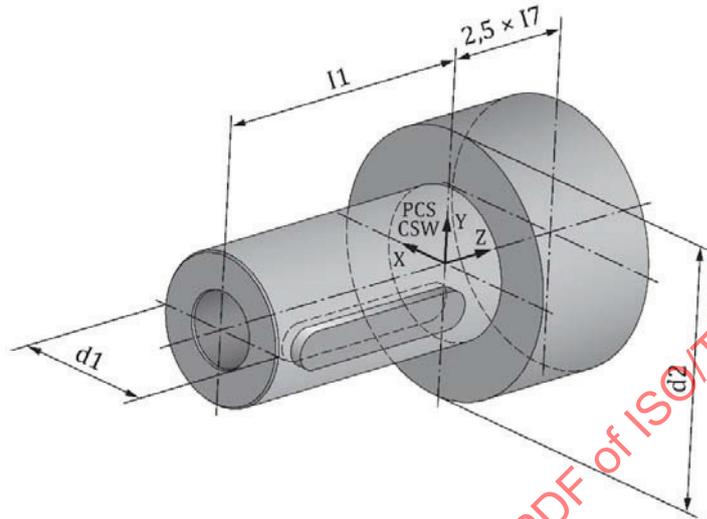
FDA-connection workpiece side with longitudinal drive key
